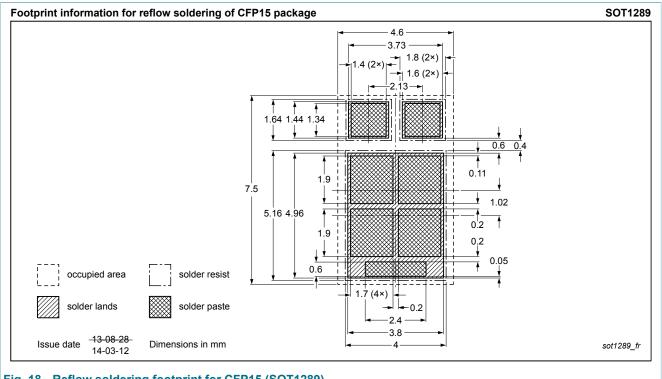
Reflow soldering footprint for CFP15 (SOT1289)
